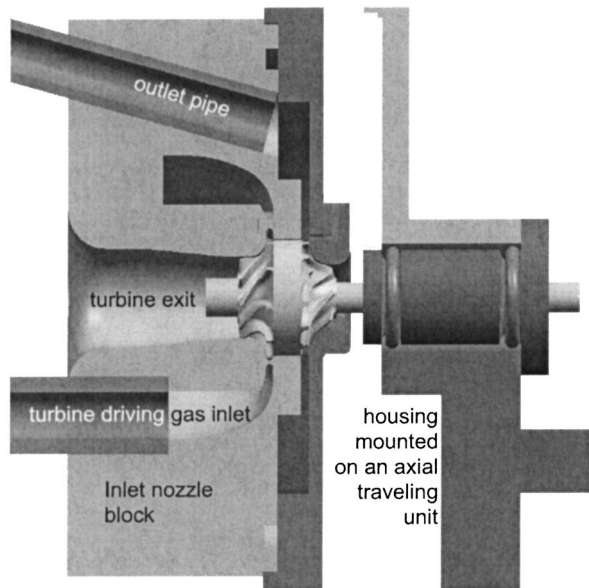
Cross section of inlet nozzle block, rotor group, bearings, and mounting unit
